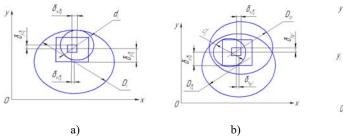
Mutual location of the bolts and holes of the i-th coupling with a gap: a) A-type coupling; b) B-type coupling
